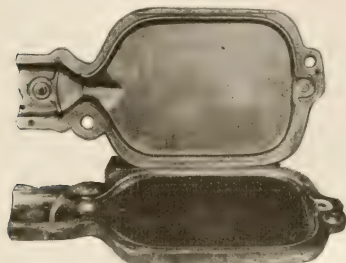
HOT WATER BOTTLE SHAPING MOLD.
